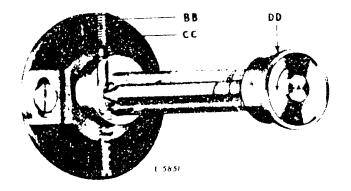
"X-Ray" View of Feed Driving Eccentric Regulating Bracket and Shaft, Showing the Feed Regulating Spindle and Adjusting Screw (CC) Which Comes in Contact with the Cone of the Spindle to Gauge the Length of Stitch
